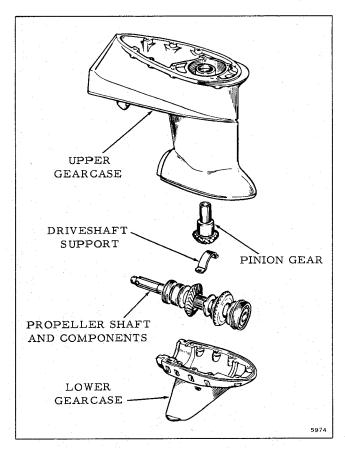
Removing Propeller Shaft and Gear Assembly
